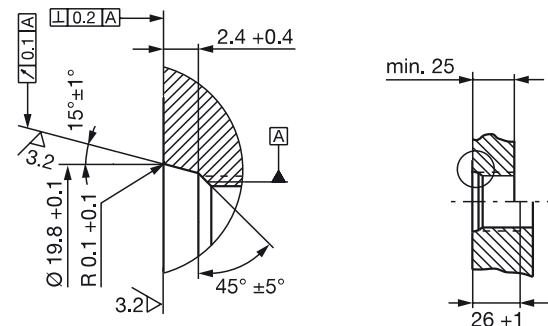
Mounting hole M18 x 1.5 per ISO 6149 O-ring 15.4 x 2.1
